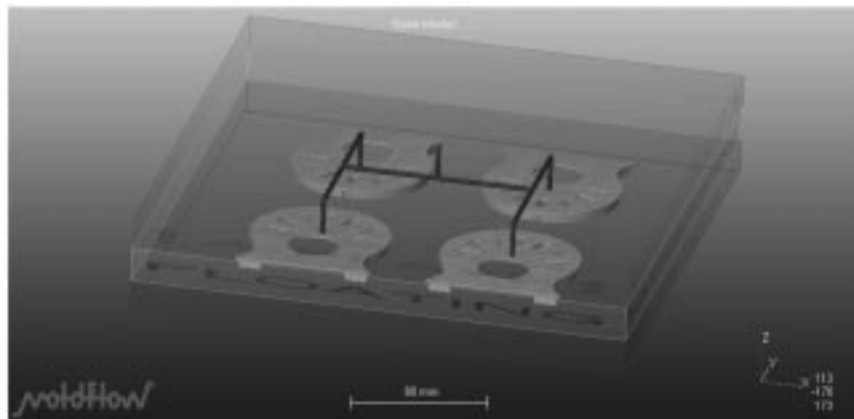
Study of a three-sheet multi-cavity mold for end covers manufacture.
